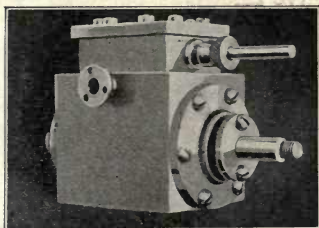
Cylinder and steam chest for model engine on which the flat surfaces were finished by spot grinding.
